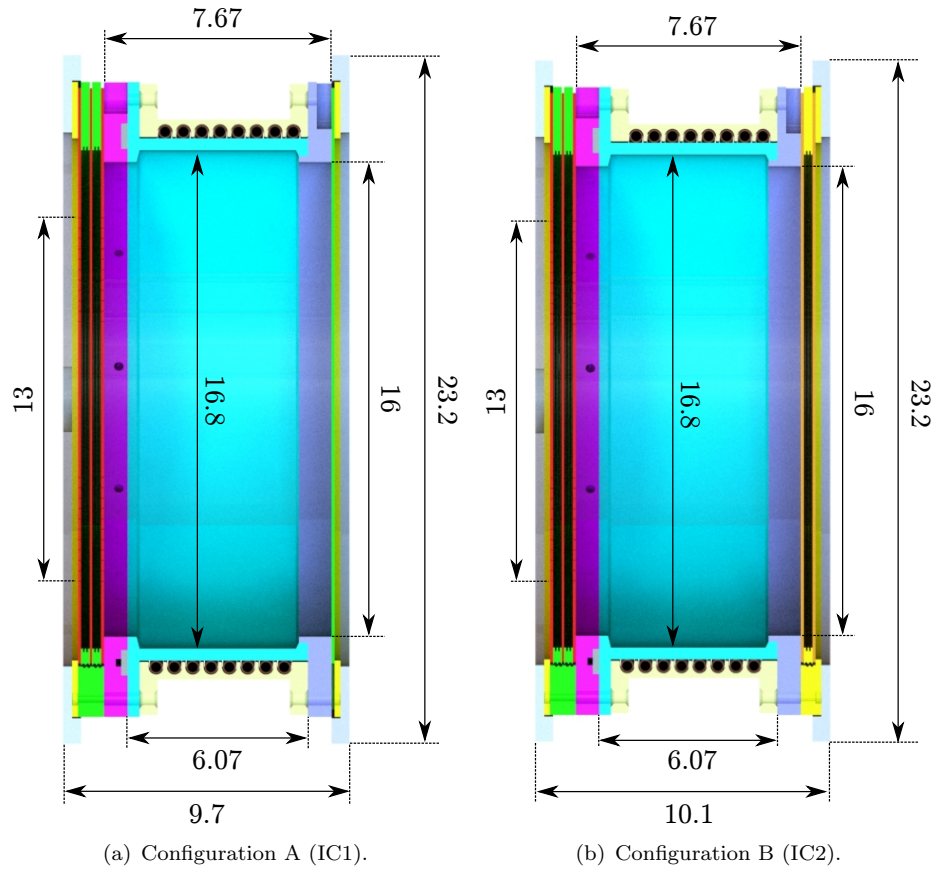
CAD drawings of the cross-sectional views of the DST thruster for Configuration A and Configuration B. All dimensions are in cm.
